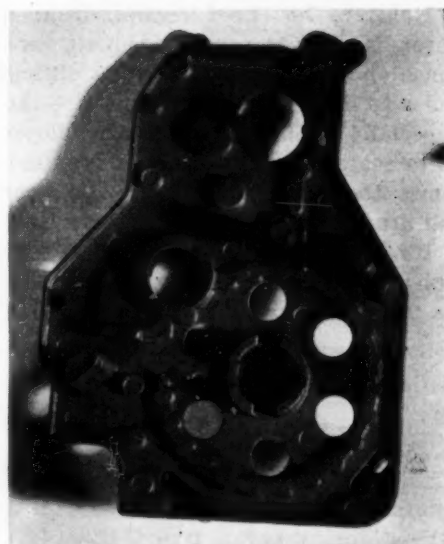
Right—Cast machine side frame showing numerous cast studs and shaped bosses
